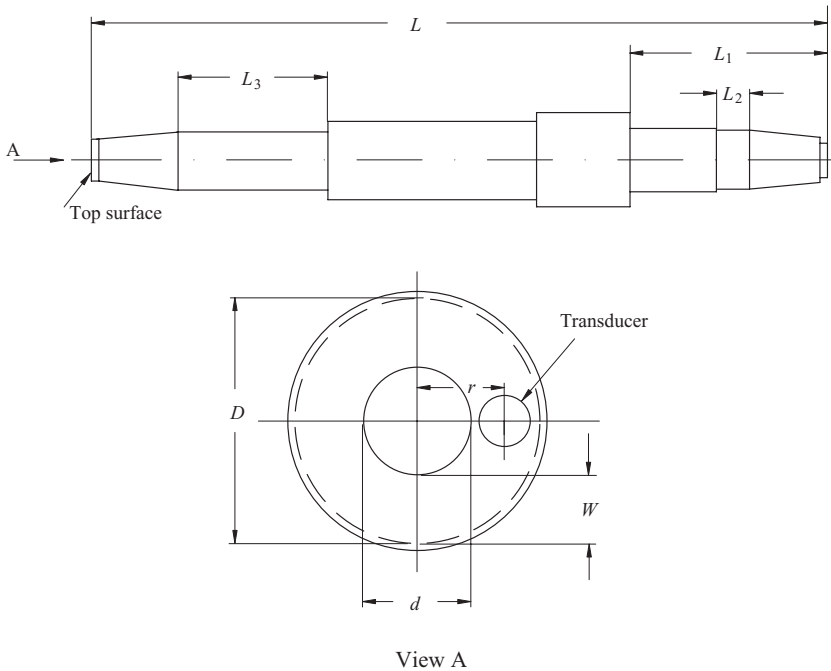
Simplified geometry of the stepped shaft and a geometry of a shaft top surface.
